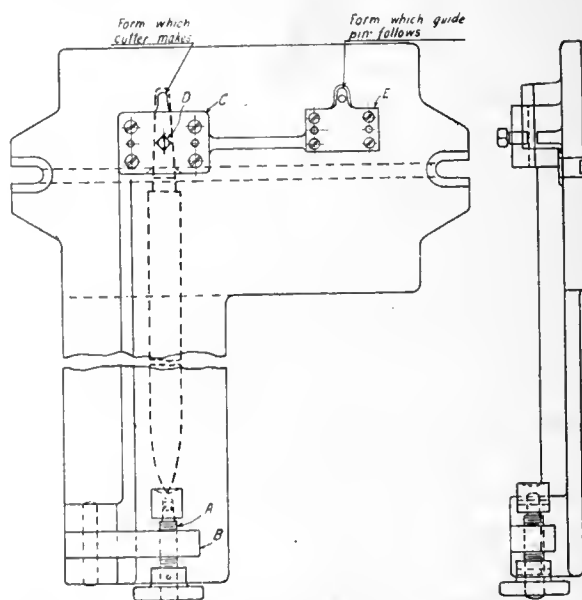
FIXTURE WITH FORM FOR PROFILING END OF TONGUE.
